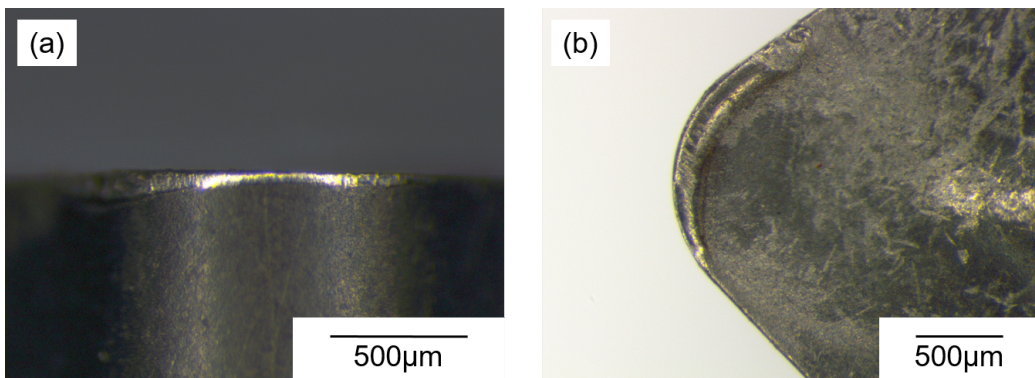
Microscope images showing the degree of tool wear after trial 3.2.2 on billet 3.2. Showing (a) the flank face and (b) the rake face.
